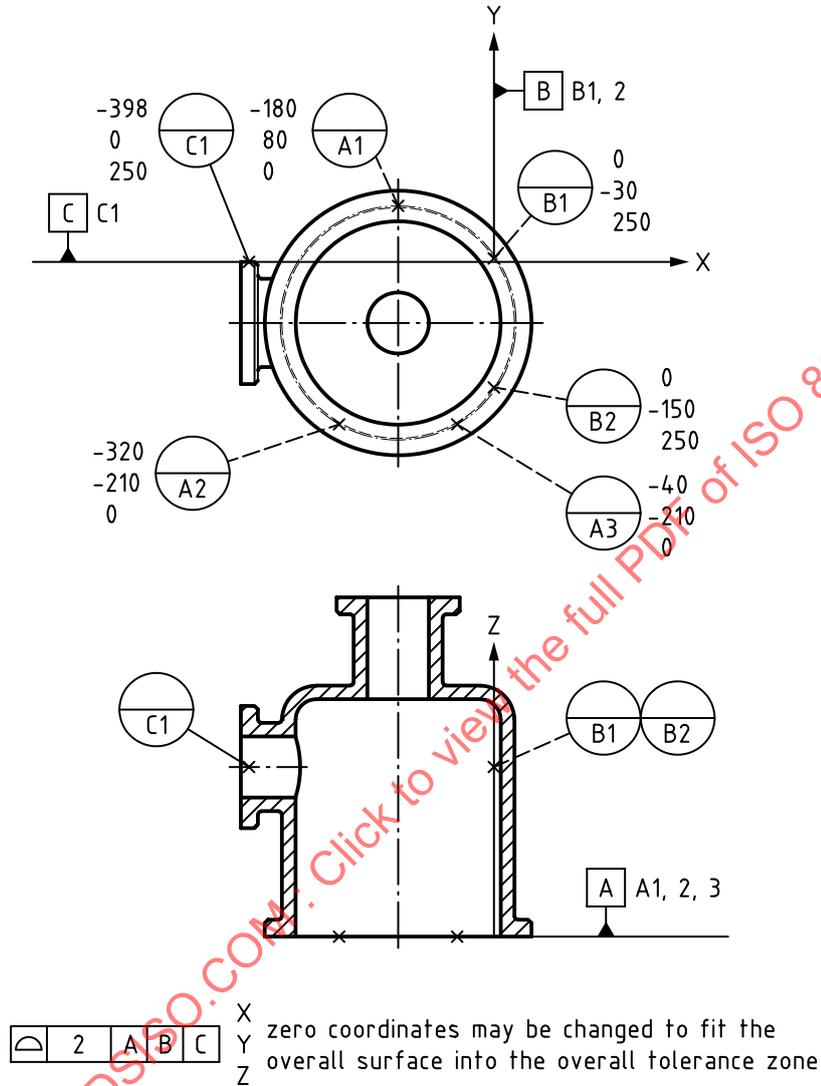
Datum system established by datum targets according to ISO 5459, location of datum targets defined by theoretically exact coordinates
